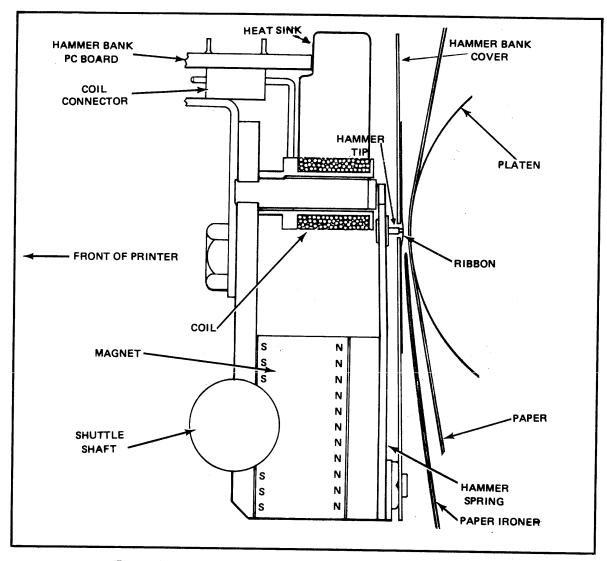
Hammer and Shuttle Arrangement, Cross Section
